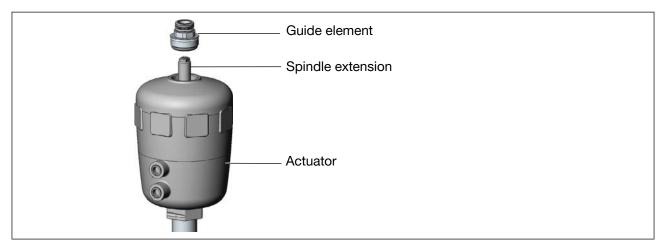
Installing the switch spindle for process valves belonging to series 26xx and 27xx; remove guide element and intermediate ring.
